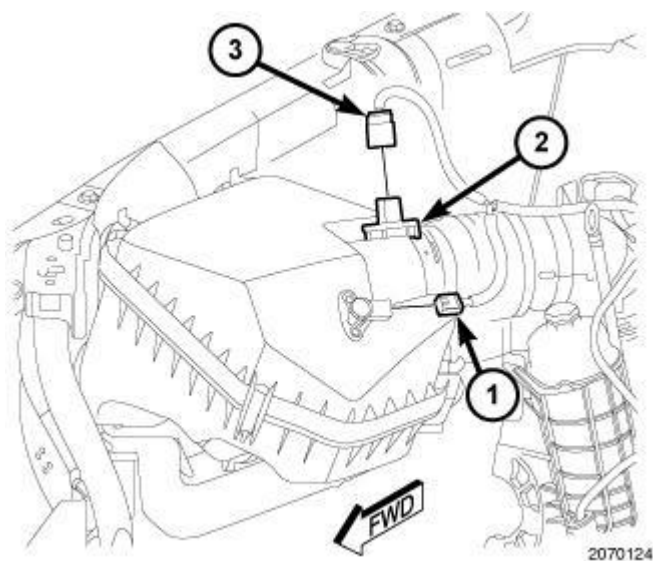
Cooling Fan Electrical Connector, Air Cleaner Housing & MAF Sensor
